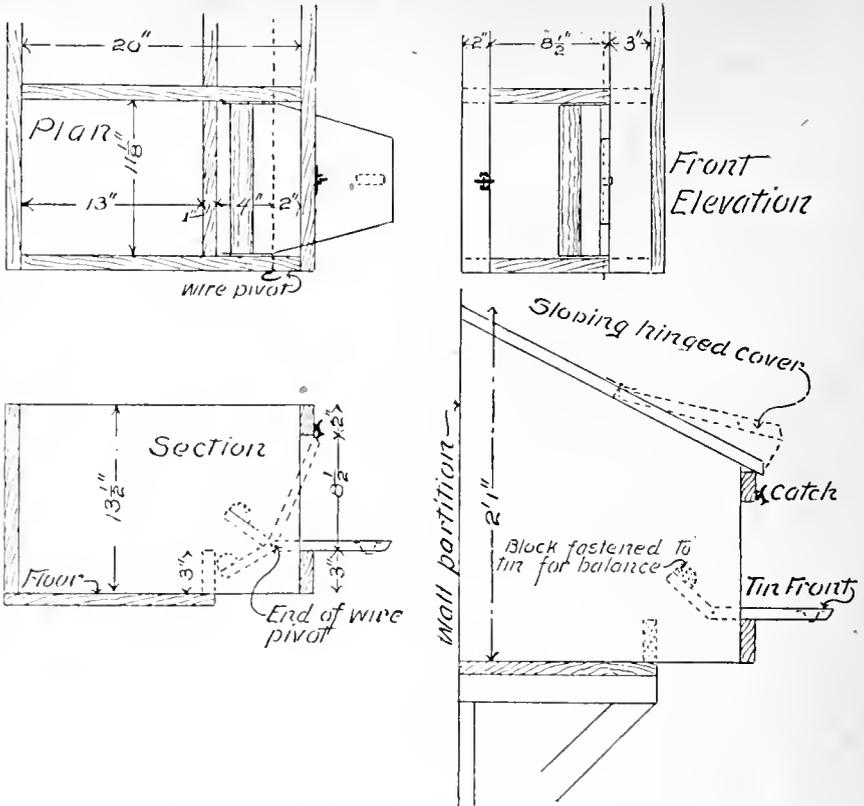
Working Plans of the Improved New York State Trap-Nest.
